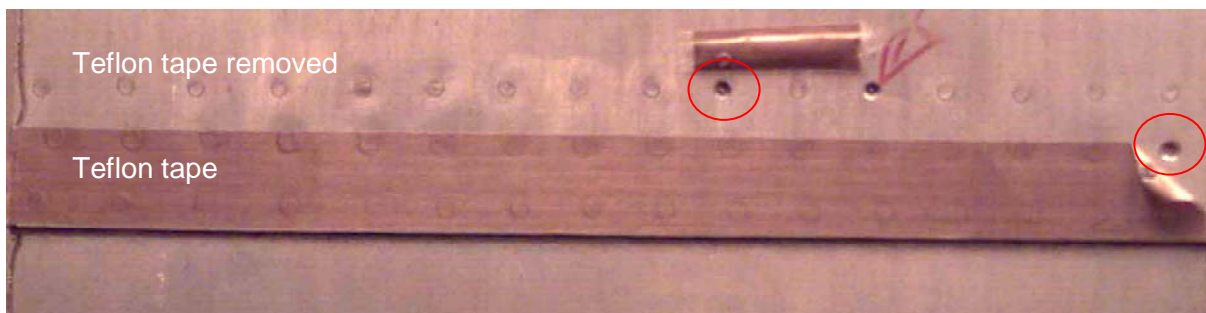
Corrosion Pillowing Induced Failure-in-Place of Rivets Discovered by Tape Peel.
